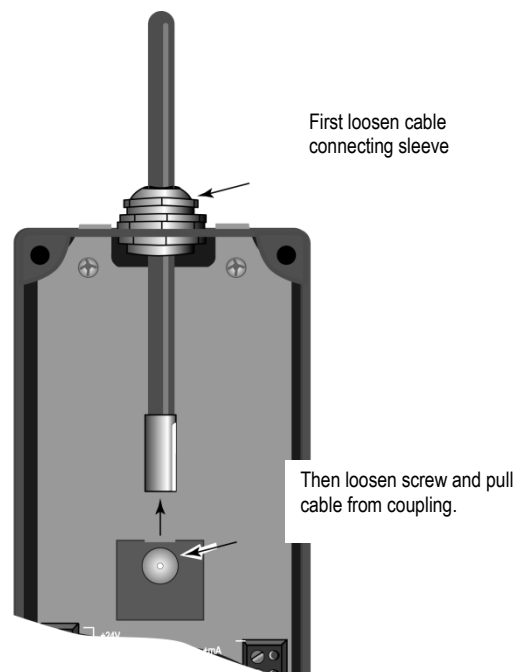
Removing the Fiber optic Cable from the Electronics Housing
